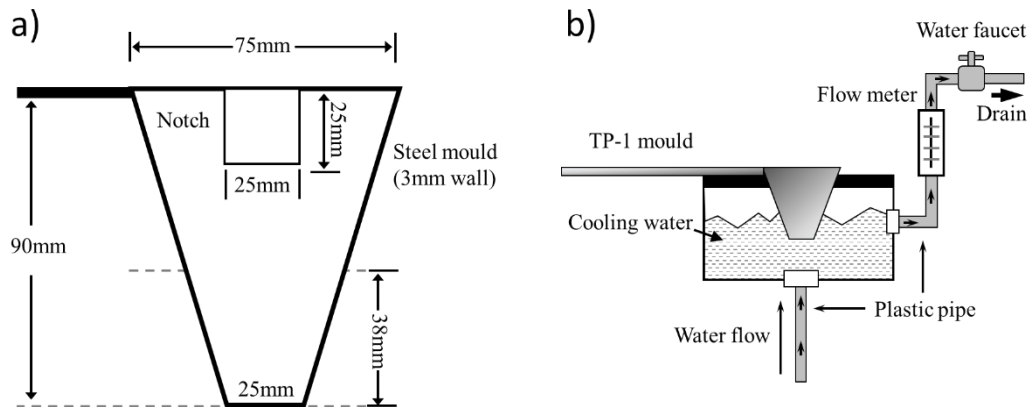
Schematics showing the (a) geometric size of TP-1 mould and (b) cooling unit for casting.
